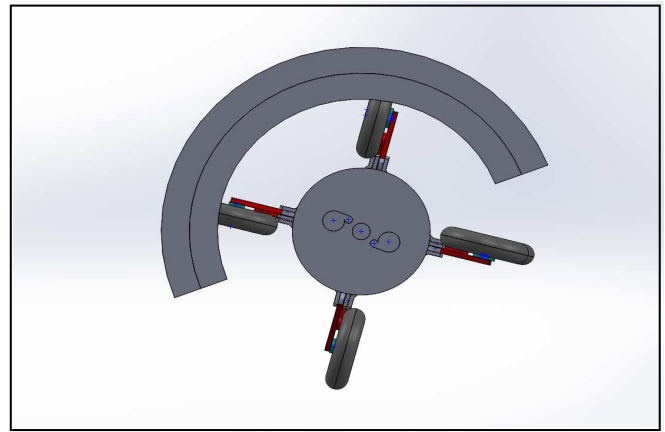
Front view of Inspection pipe robot inside a test pipe (The test pipe is represented as an arc is a varying diameter with the inspection robot navigating through it).
